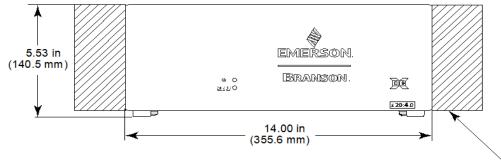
DCX V Power Supply Vertical Mount Dimensional Drawing (400 W, 750 W and 800 W).
